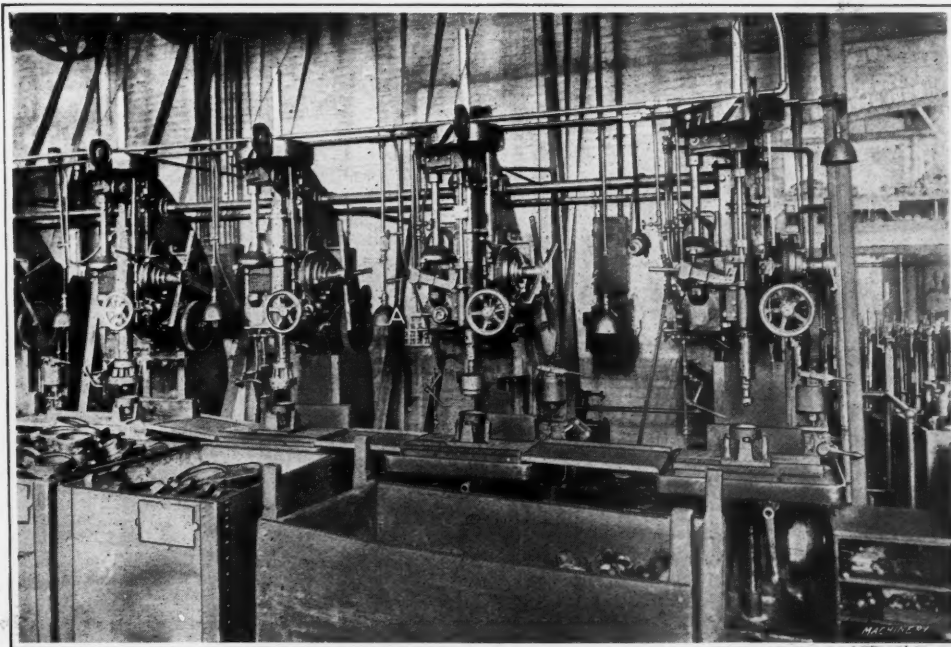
Arrangement of Compressed-air Control for Spindle Reverse Mechanism for Threading and Tapping
